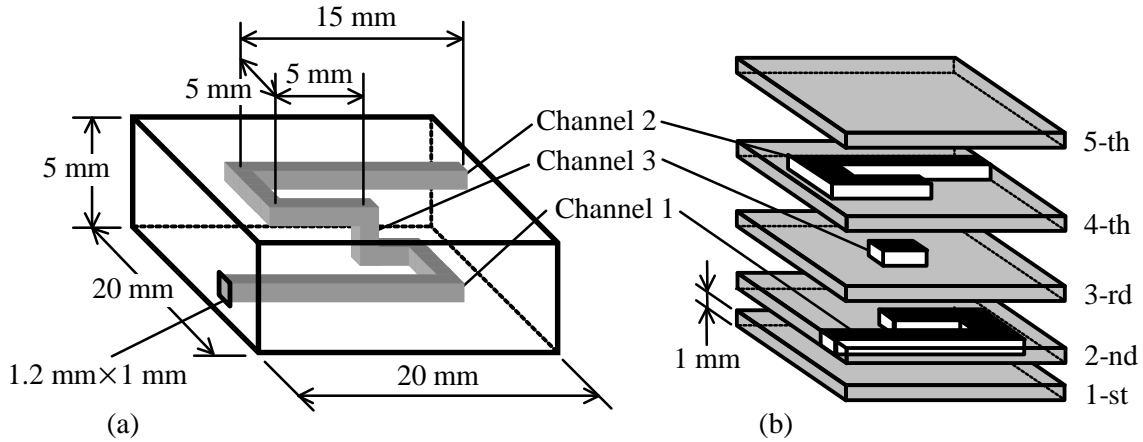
Schematic drawing of the model with inside channels (a) and its layer construction (b).
